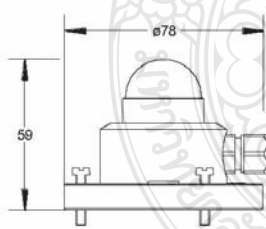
LP02 dimensions. Standard cable length is 5 m. All dimensions are in mm. Cable can be installed / replaced by the user.
